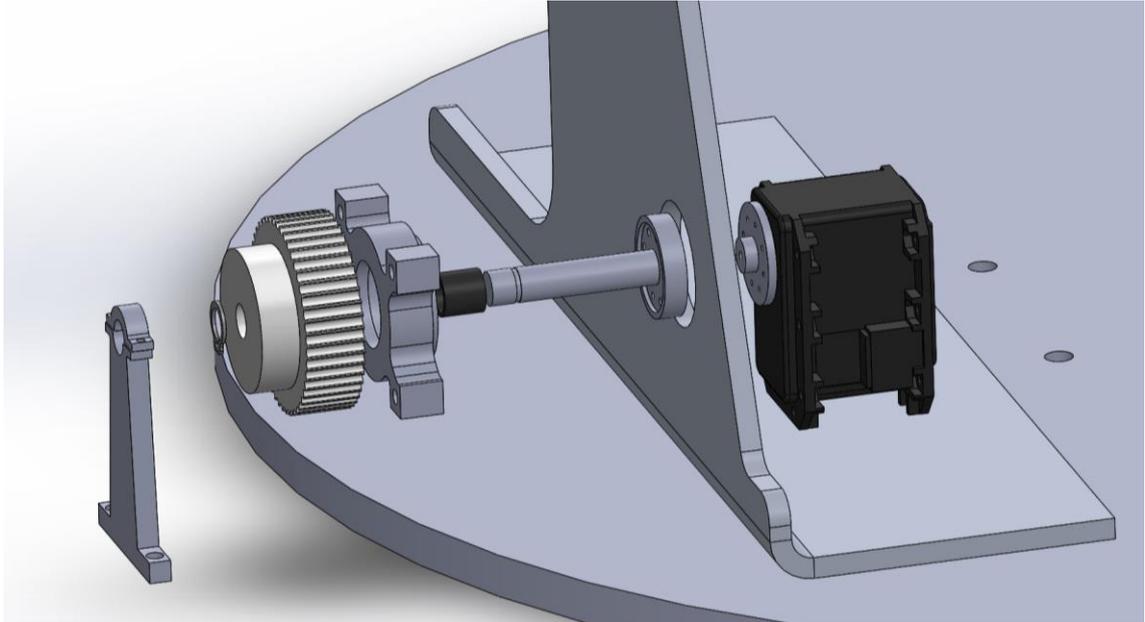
Exploded view of the modification in the driver part of the pitch angle subsystem.
